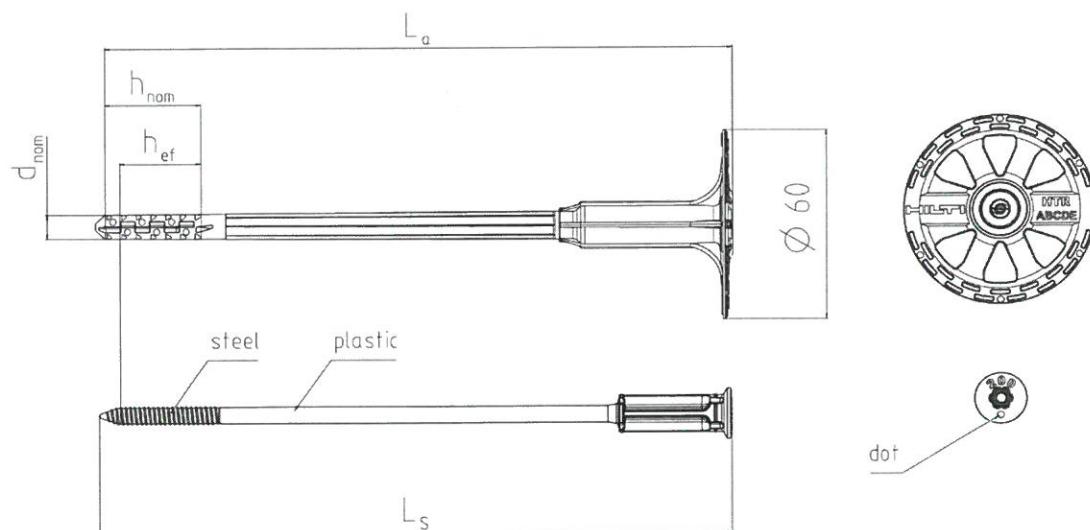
HTR-M - assembled sleeve, plate and composite screw
